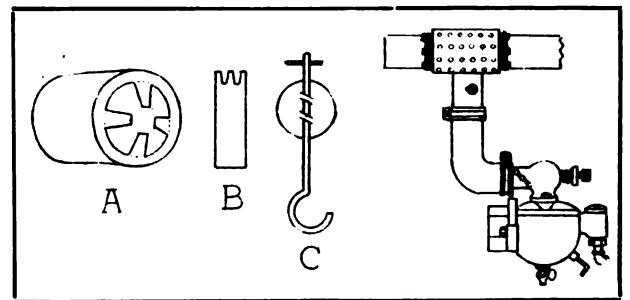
The Components of the Home-Made Carburetor Heater and How It Is Assembled.
